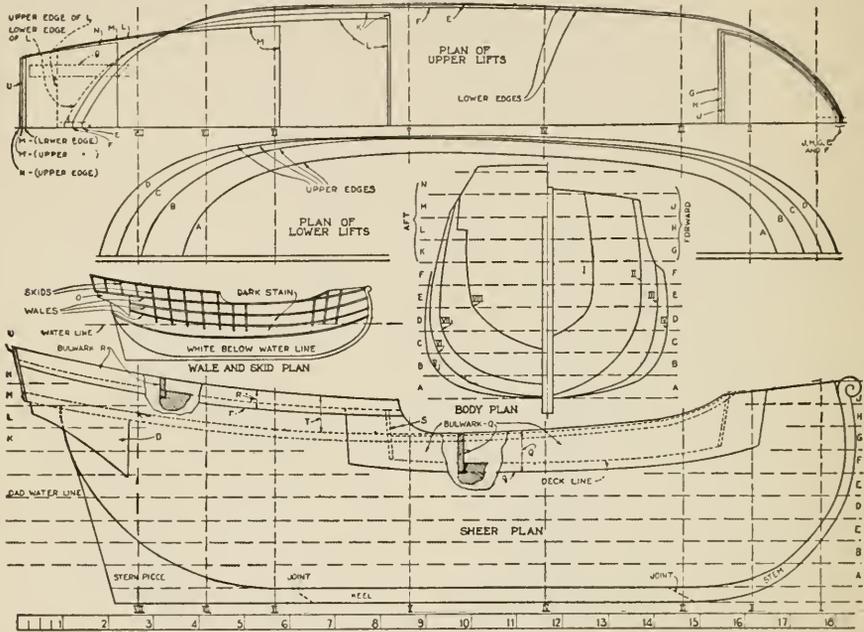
Sheer plan, body plan, and upper and lower lift plans drawn to the inch scale indicated; and a wale and skid plan drawn to a smaller scale.
